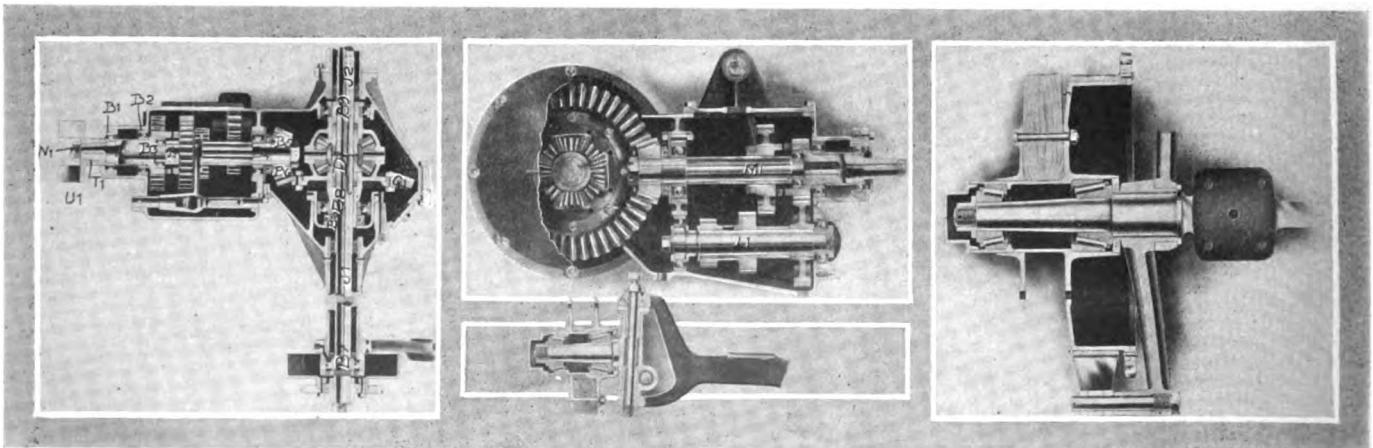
Sectional plan view of transmission, differential and jackshaft. Fig. 7—Sectional view, side elevation of transmission and differential. Fig. 8—Front axle, presenting sectional view of steering knuckle pin, bearings, and hub. Fig. 9—Sectional view of rear brake drum and wheel bearings
